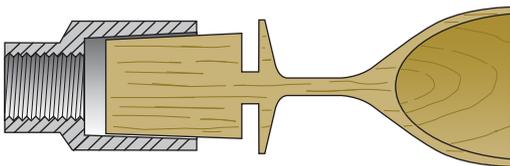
Cup chuck; note mating taper turned on end of stock
